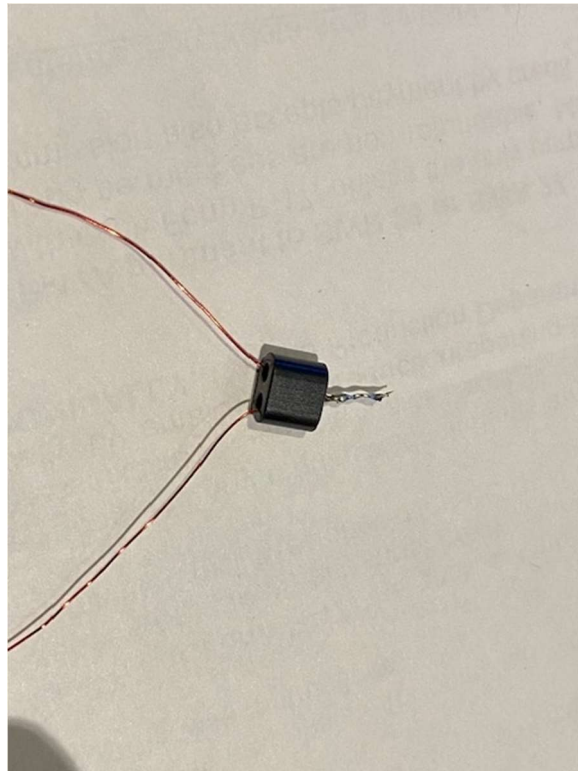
Soldered Legs Forming CT Inserted In B43-2403 Core.
